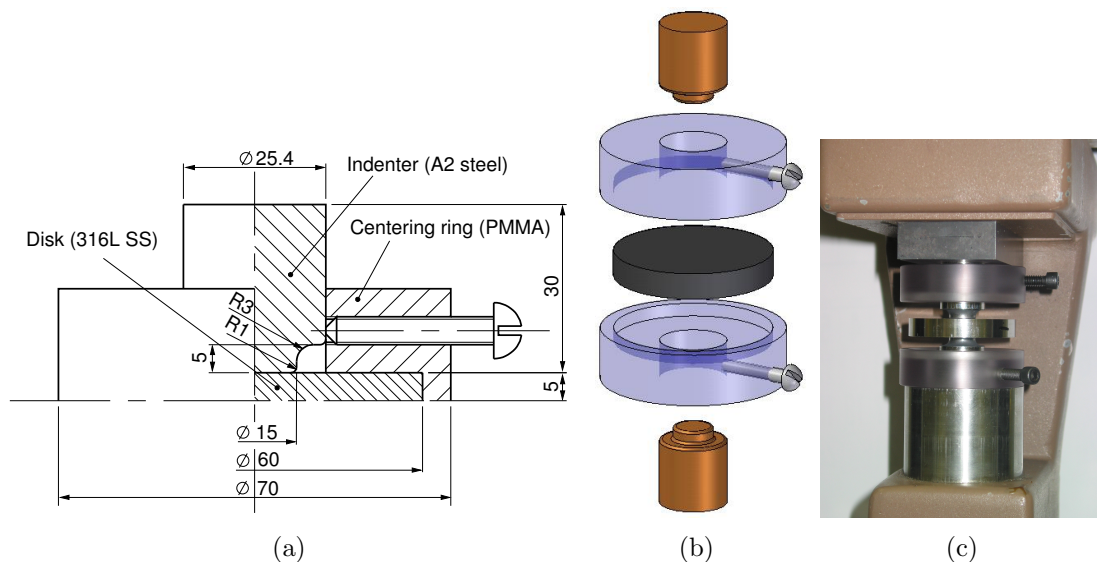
Design of the indentation fixture and photo of the indentation fixture and specimen in the load frame.
